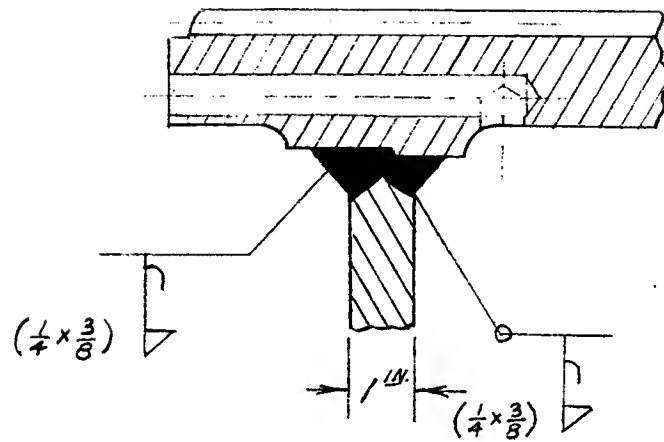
Casewriter's sketch of a typical sector of gear showing location and direction of cracks before weld was machined off and gear "exploded". Photographs of cracks after the weld was machined off are shown in Exhibit 4.
